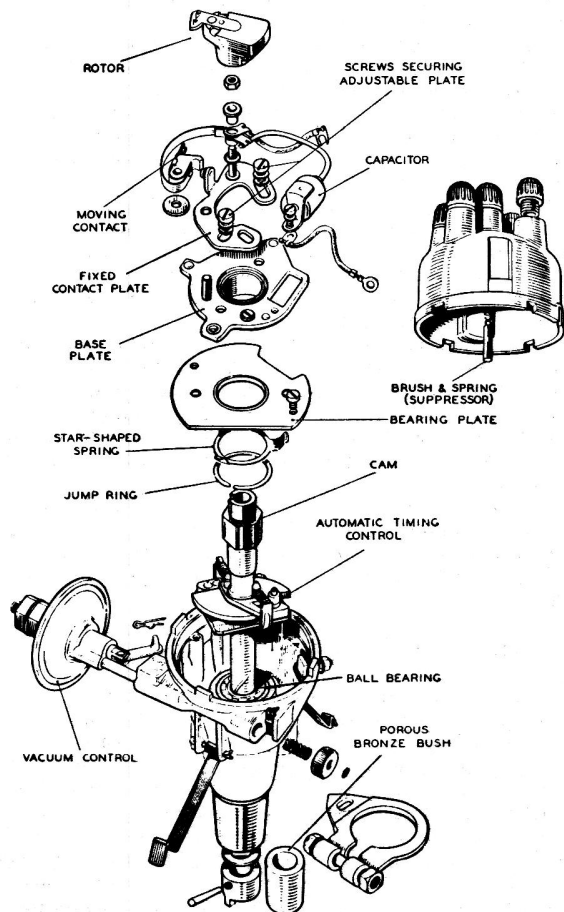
Exploded view of the distributor (type DMBZ6A illustrated)
